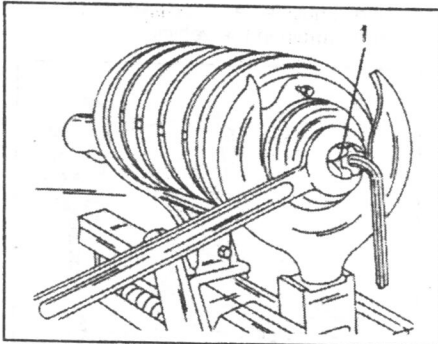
Slackening of the nut (1) at the end of the piston rod.
